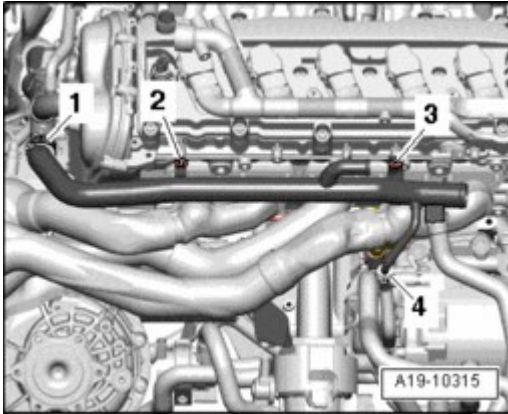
Removing Bolts, Loosening Hose Clamps And Removing Right Coolant Pipe From Coolant Hoses
